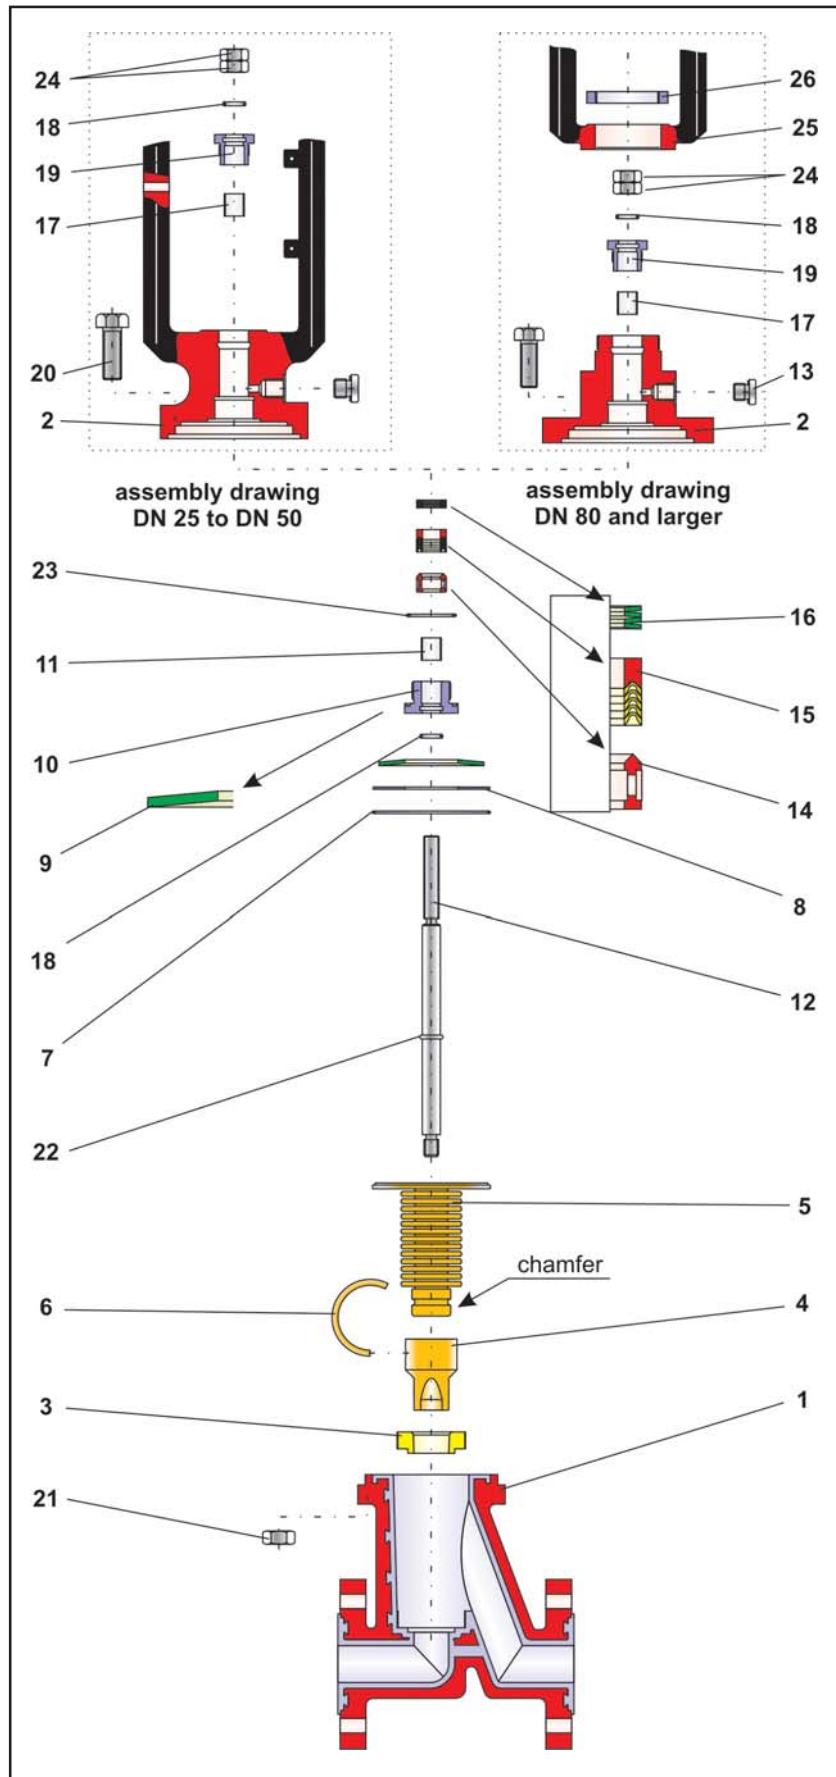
Explosion drawing of the valve, Series 1b, from year 2006
